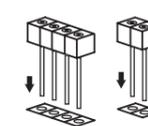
IDE Port Assembling To The FK1101 Circuit Board.
